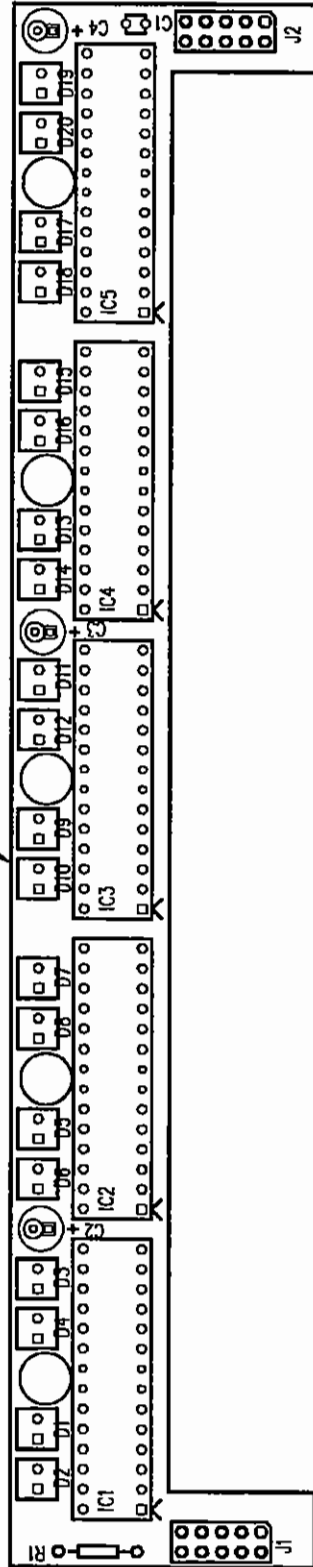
Assembly Drawing - ICS-92 Display PCB Rev. A
